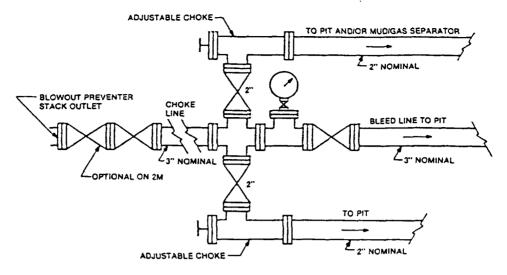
Typical choke manifold assembly for 2M and 3M rated working pressure service — surface installation.
